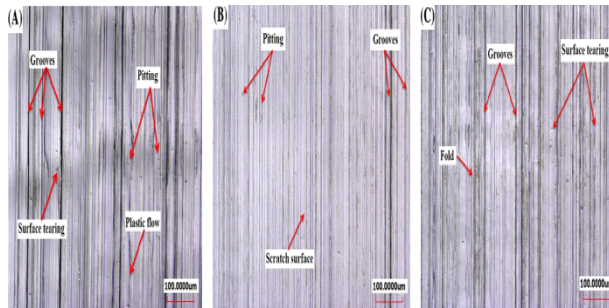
Scratch of workpiece surface due to cutting oil⁽⁴⁾
